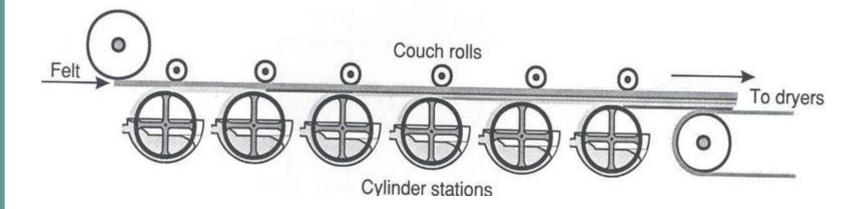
A cylinder machine with six cylinders at which a paper layer can be formed
